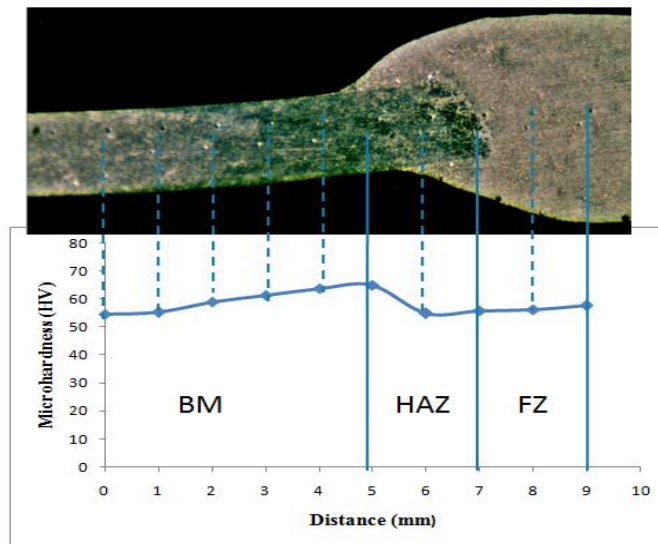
Hardness value of weld joint AA6061-AA6061 using filler ER4047
